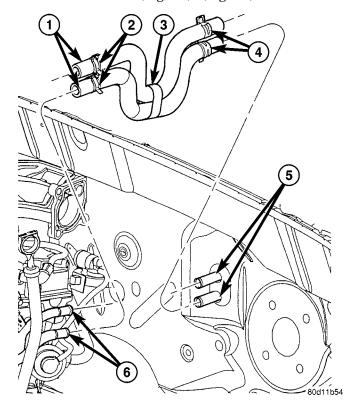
Heater Hose Assembly- LHD 2.0L (Typical 2.4L)
